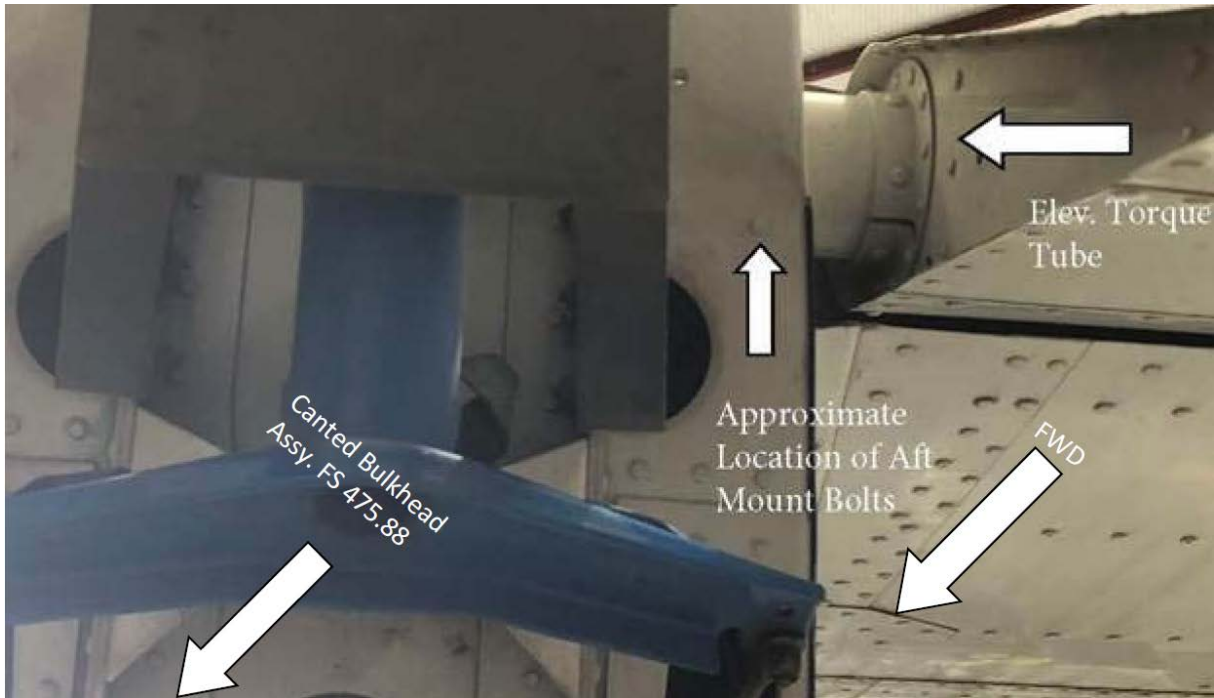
Installation of Right Side Aft Horizontal Mount Bolt (P/N AN4-12A)
